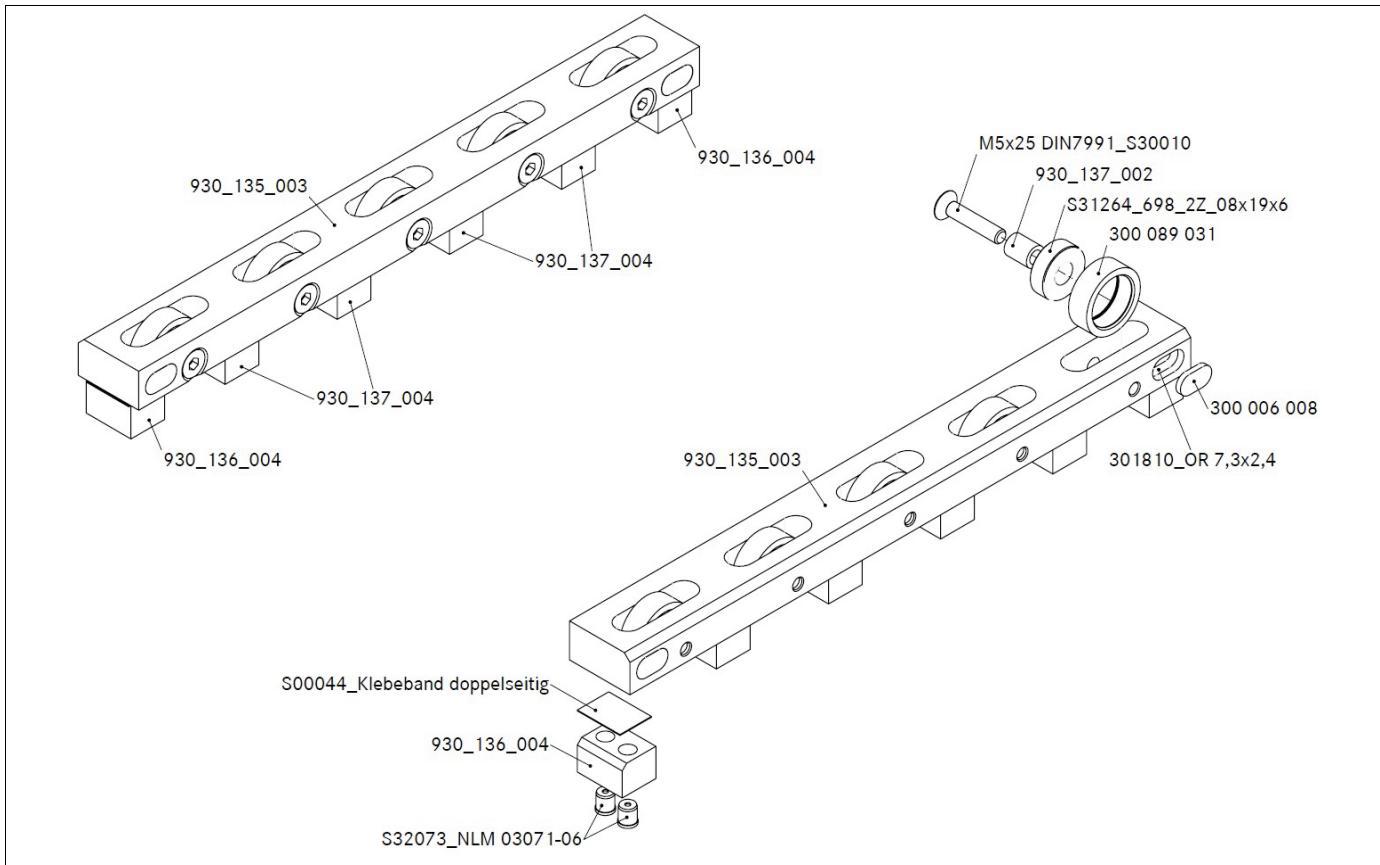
Spring loaded roller bar for ZE/ZED in roller section (UB240 PB160-400)
